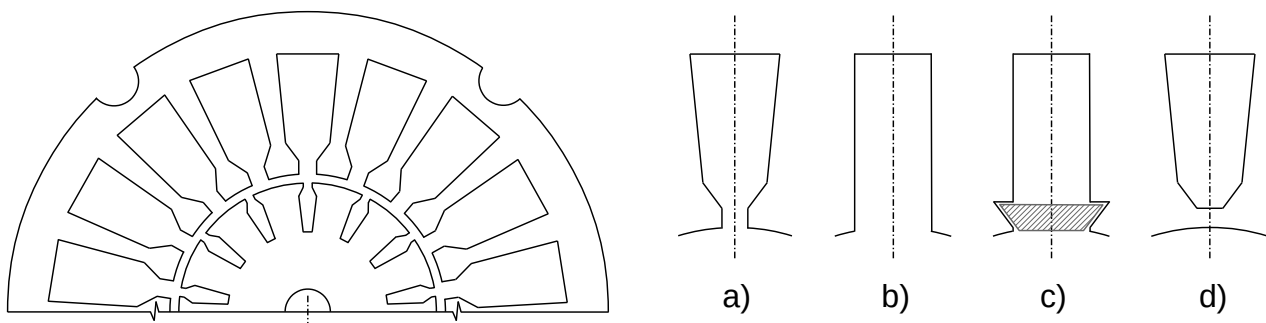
Left: Cutaway of rotor and stator sheets that constitute a magnetic circuit; Right: Main types of slot shapes: a) semi-closed slot, b) open slot, c) open slot to be closed with wedge, d) closed slot.
